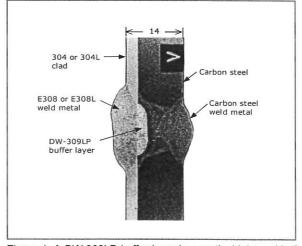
A DW-309LP buffer layer in a vertical joint weld of stainless-clad steel.
